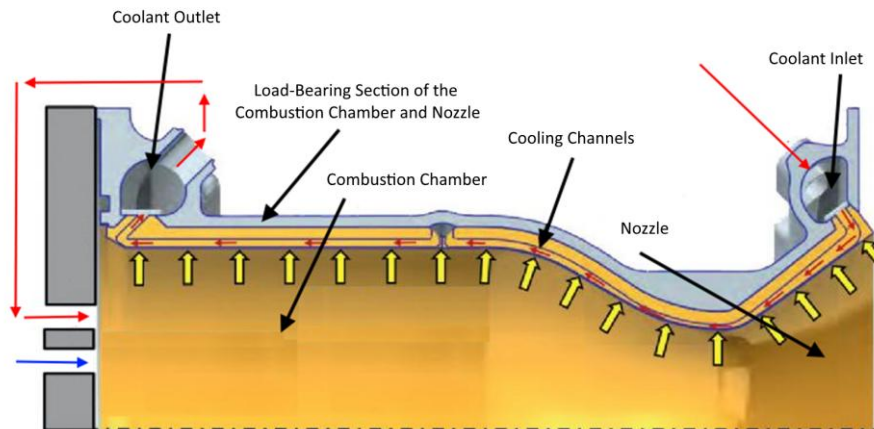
Combustion Chamber with Liquid Rocket Engine Nozzle
